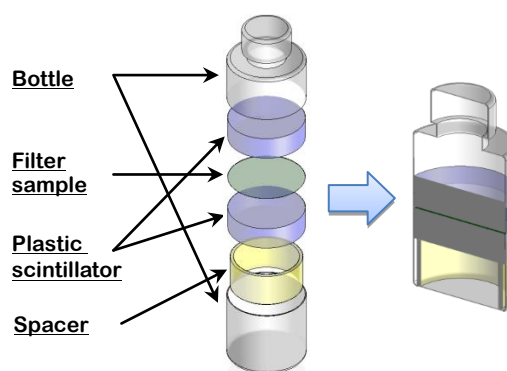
Assembly of the plastic scintillator bottle (PSB).
